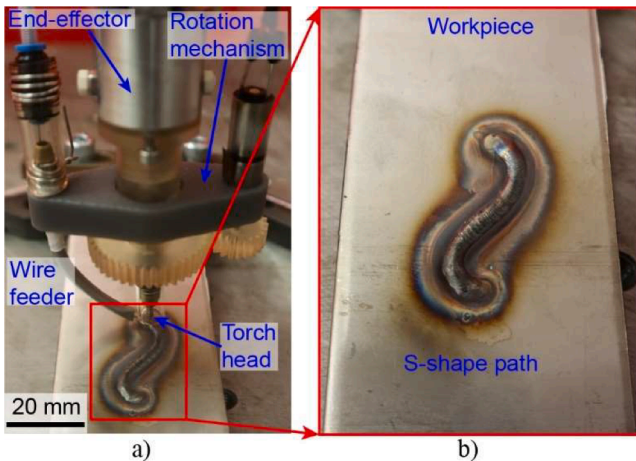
Details and results for the collaborative macro-mini manipulator system to follow an S-shape path on an inclined surface. a) Detailed view of the end-effector and rotation wire feeder mechanism; b) The final welding results for following an S-shape path.
